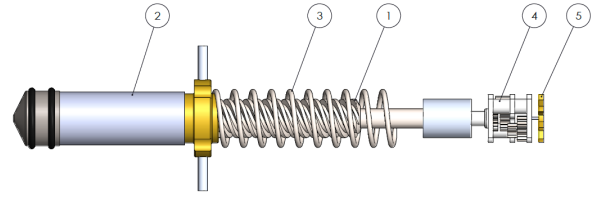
CAD model of the mechanical insulin pump drive mechanism with key components labelled
